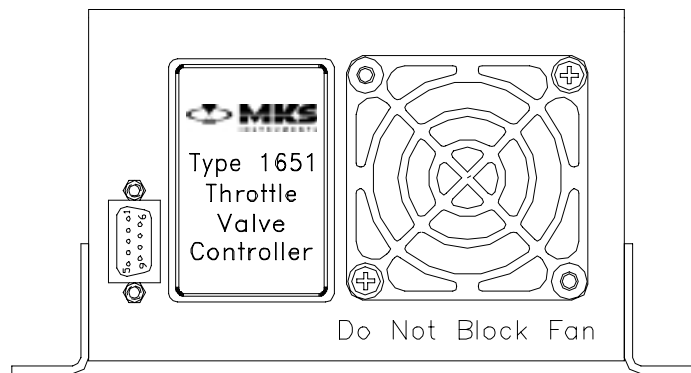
Mounting Brackets Attached to the Front of the Type 1651 Unit
